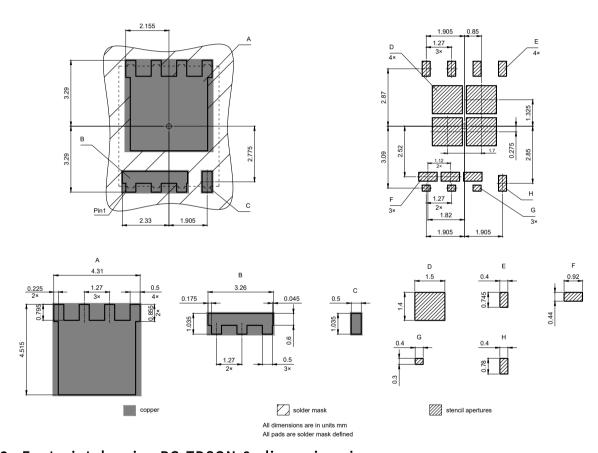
Footprint drawing PG-TDSON-8, dimensions in mm
